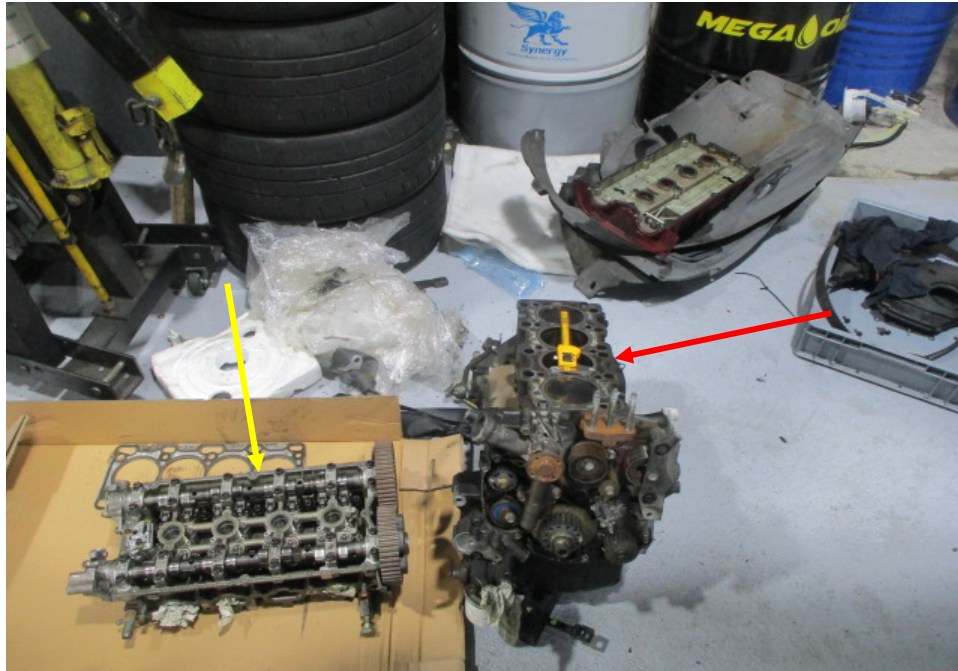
shows the top block (yellow arrow) of the Mitsubishi engine separated from its bottom block (red arrow). This was to enable me to carry out measurements of its cylinders, in particular the bore and stroke measurements of each cylinder, which typically can be used to determine the engine displacement or more commonly referred to as engine cc.
